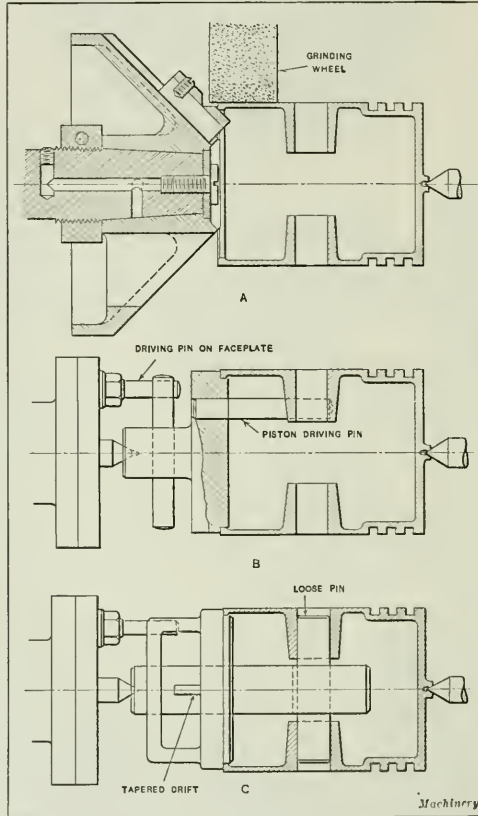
Three Types of Fixtures or Arbors for holding Pistons while grinding
